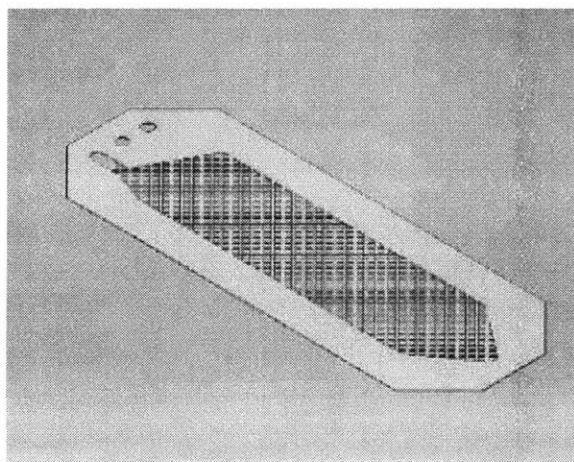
3D AutoCAD Inventor drawing used for 3D printing.
